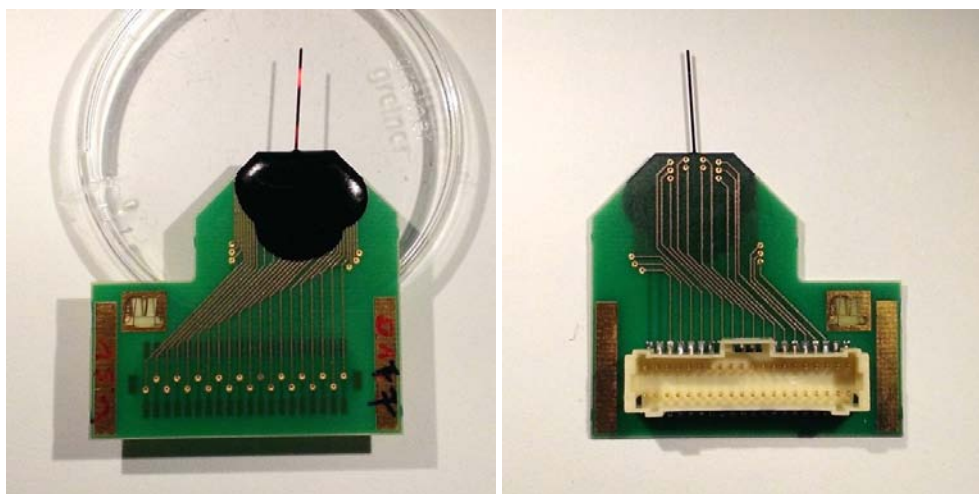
Photo of a C-100-A/CMOS needle bonded to its PCB board.
